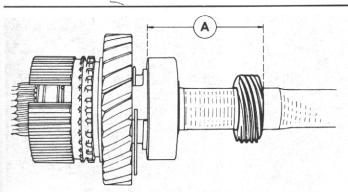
Speedometer drivegear fitting position (Sec 7)
